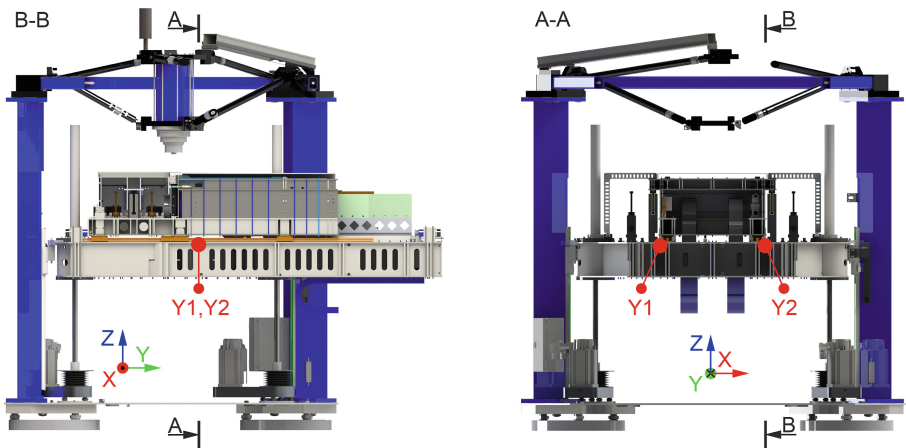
Sectional views of the demonstrator machine with sensor positions Y1 and Y2
